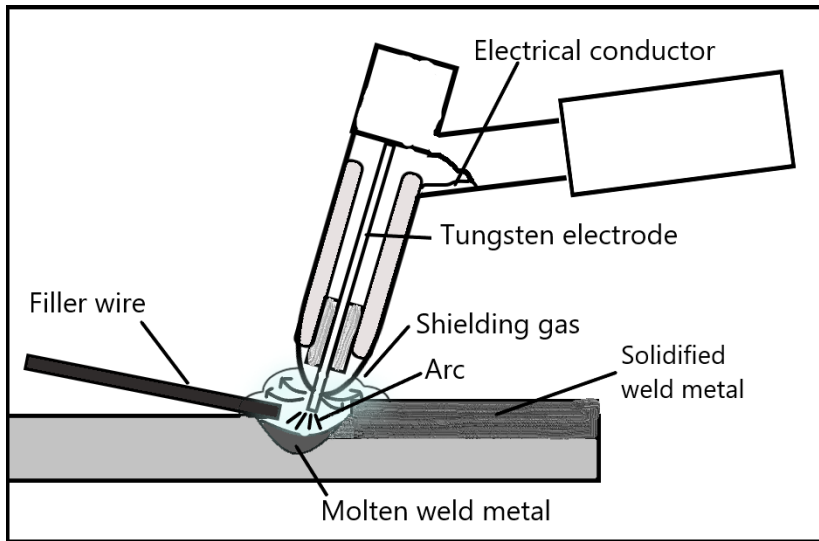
GTAW: Gas tungsten arc welding, often called TIG- welding from the term ‘tungsten inert gas welding’. This process has a non-consumable electrode and a separate filler wire. Adapted from [24, p. 3.1].
